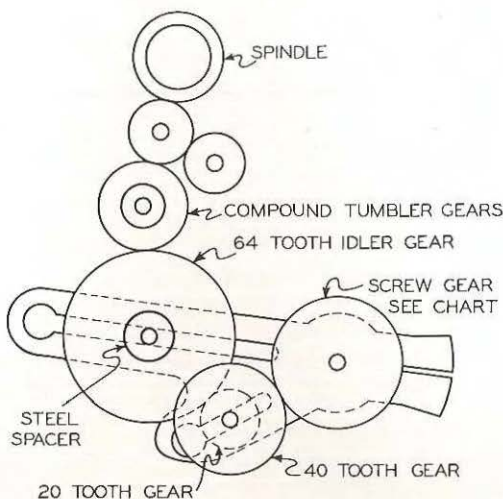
Gear set-up for 11 through 16 threads per inch.
